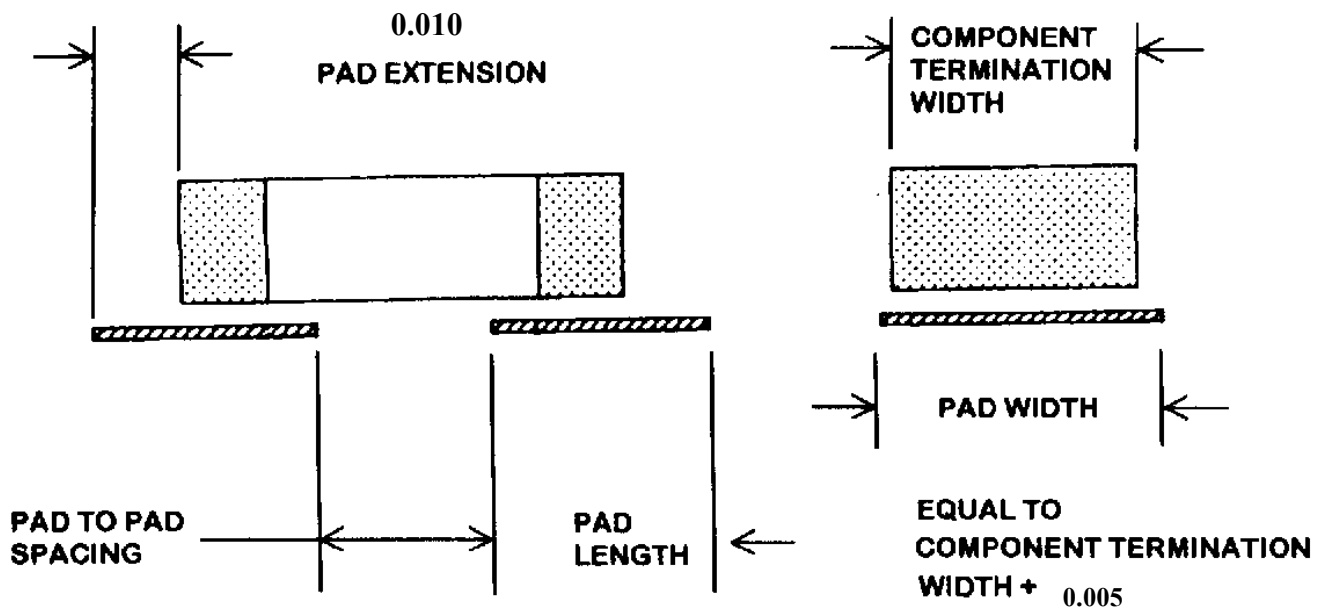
SOLDER PADS FOR 0201 CHIP COMPONENTS
